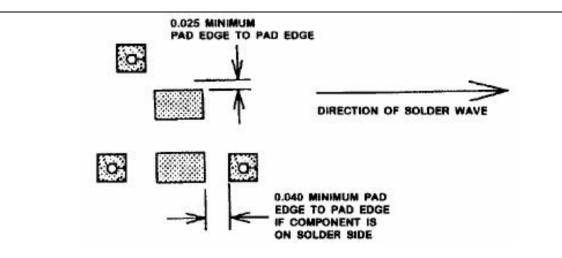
VIA PLACEMENT FOR SOLDER SIDE CHIPS
